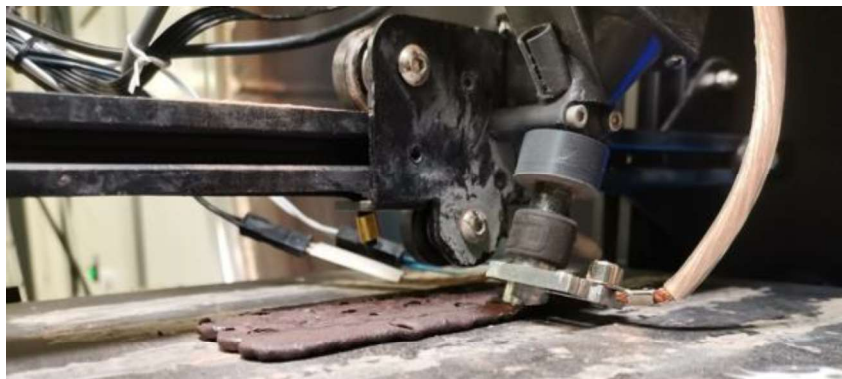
Assembled material extrusion prototype to integrated in the environmental chamber
